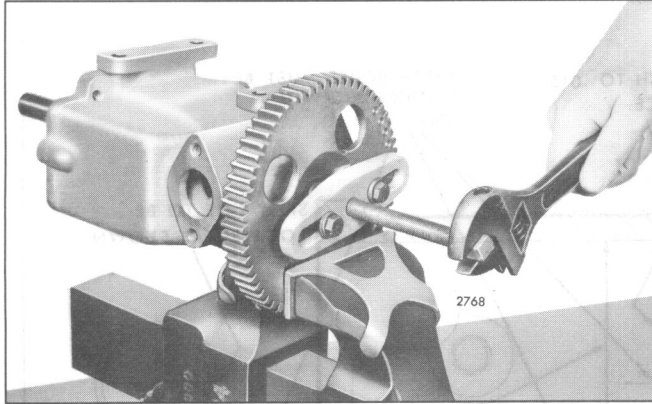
Removing Oil Pump Drive-Driven Gear
